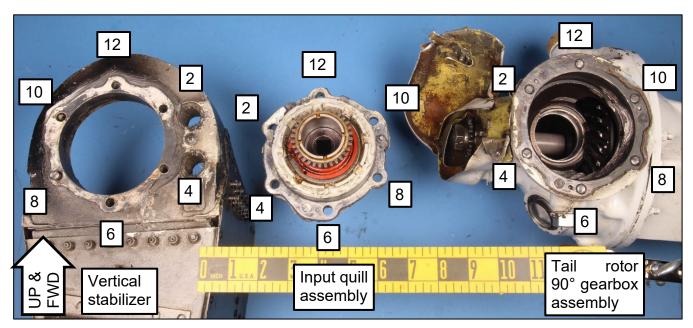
Upper aft side of the vertical stabilizer, mating surface of the input quill assembly, and mounting surface from the tail rotor 90° gearbox assembly. Mounting studs and corresponding attachment holes are numbered by clock position for reference.
